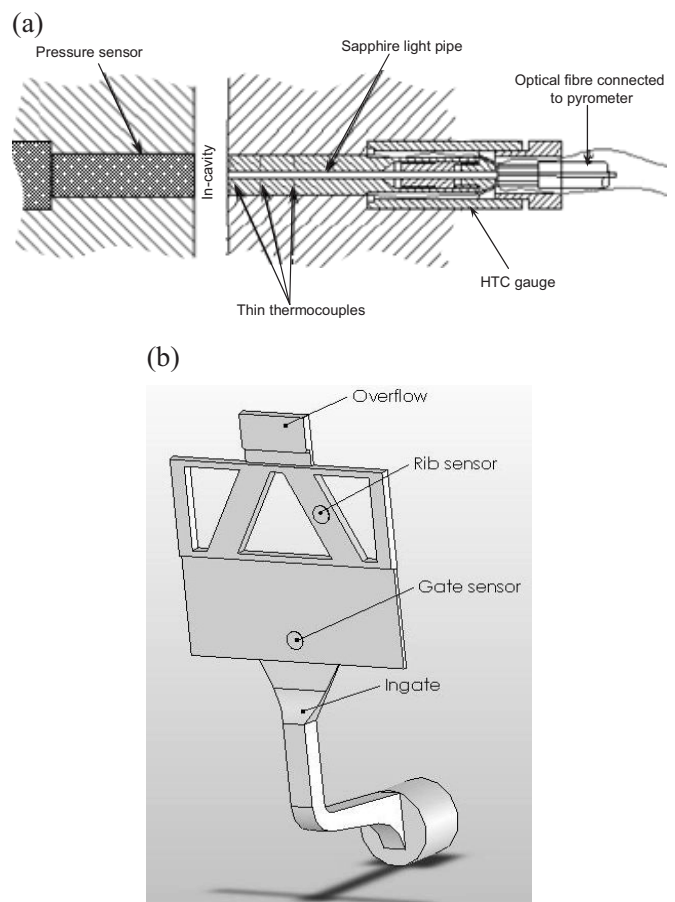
(a) Vertical cross section of the die, showing the Heat Transfer Coefficient gauge (HTC gauge) and pressure sensor. (b) Experimental casting, showing location of sensors. The plate region is slightly over 2 mm thick and the rib region is 5 mm thick. The pressure sensor locations are visible here, and the heat-flow sensors were located precisely opposite the pressure sensors. The pressure sensors were situated in the moving half of the die while the heat transfer measurement configuration was placed in the fixed half of the die.
